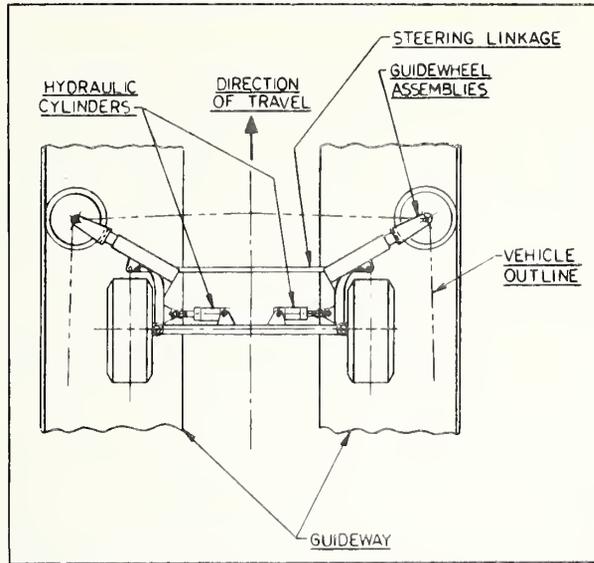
CAR STEERING ON GUIDEWAY (OVERHEAD VIEW)
